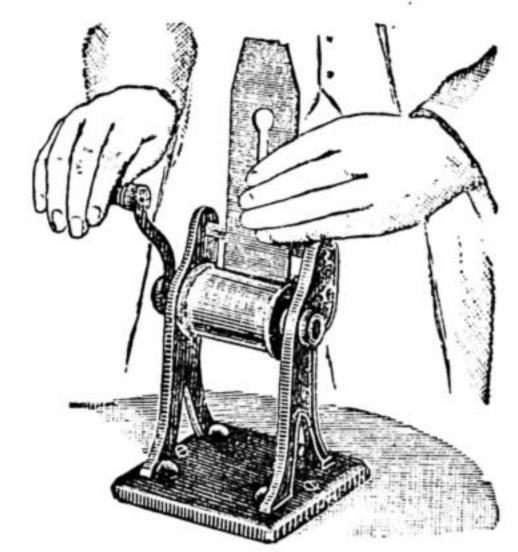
Plane Iron, Chisel, and Tool Sharpening Machine: Plested's Patent.
